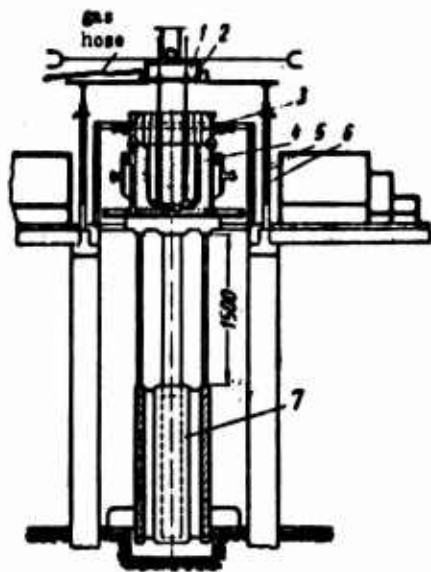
Diagram of installation for manufacture of large dimension thin-walled castings by method of directed crystallization: 1 - pouring basin; 2 - tubular flow gates; 3 - flow gates-wells in mold; 4 - mold; 5 - sliding rods; 6 - supports; 7 - hydraulic hoist.
